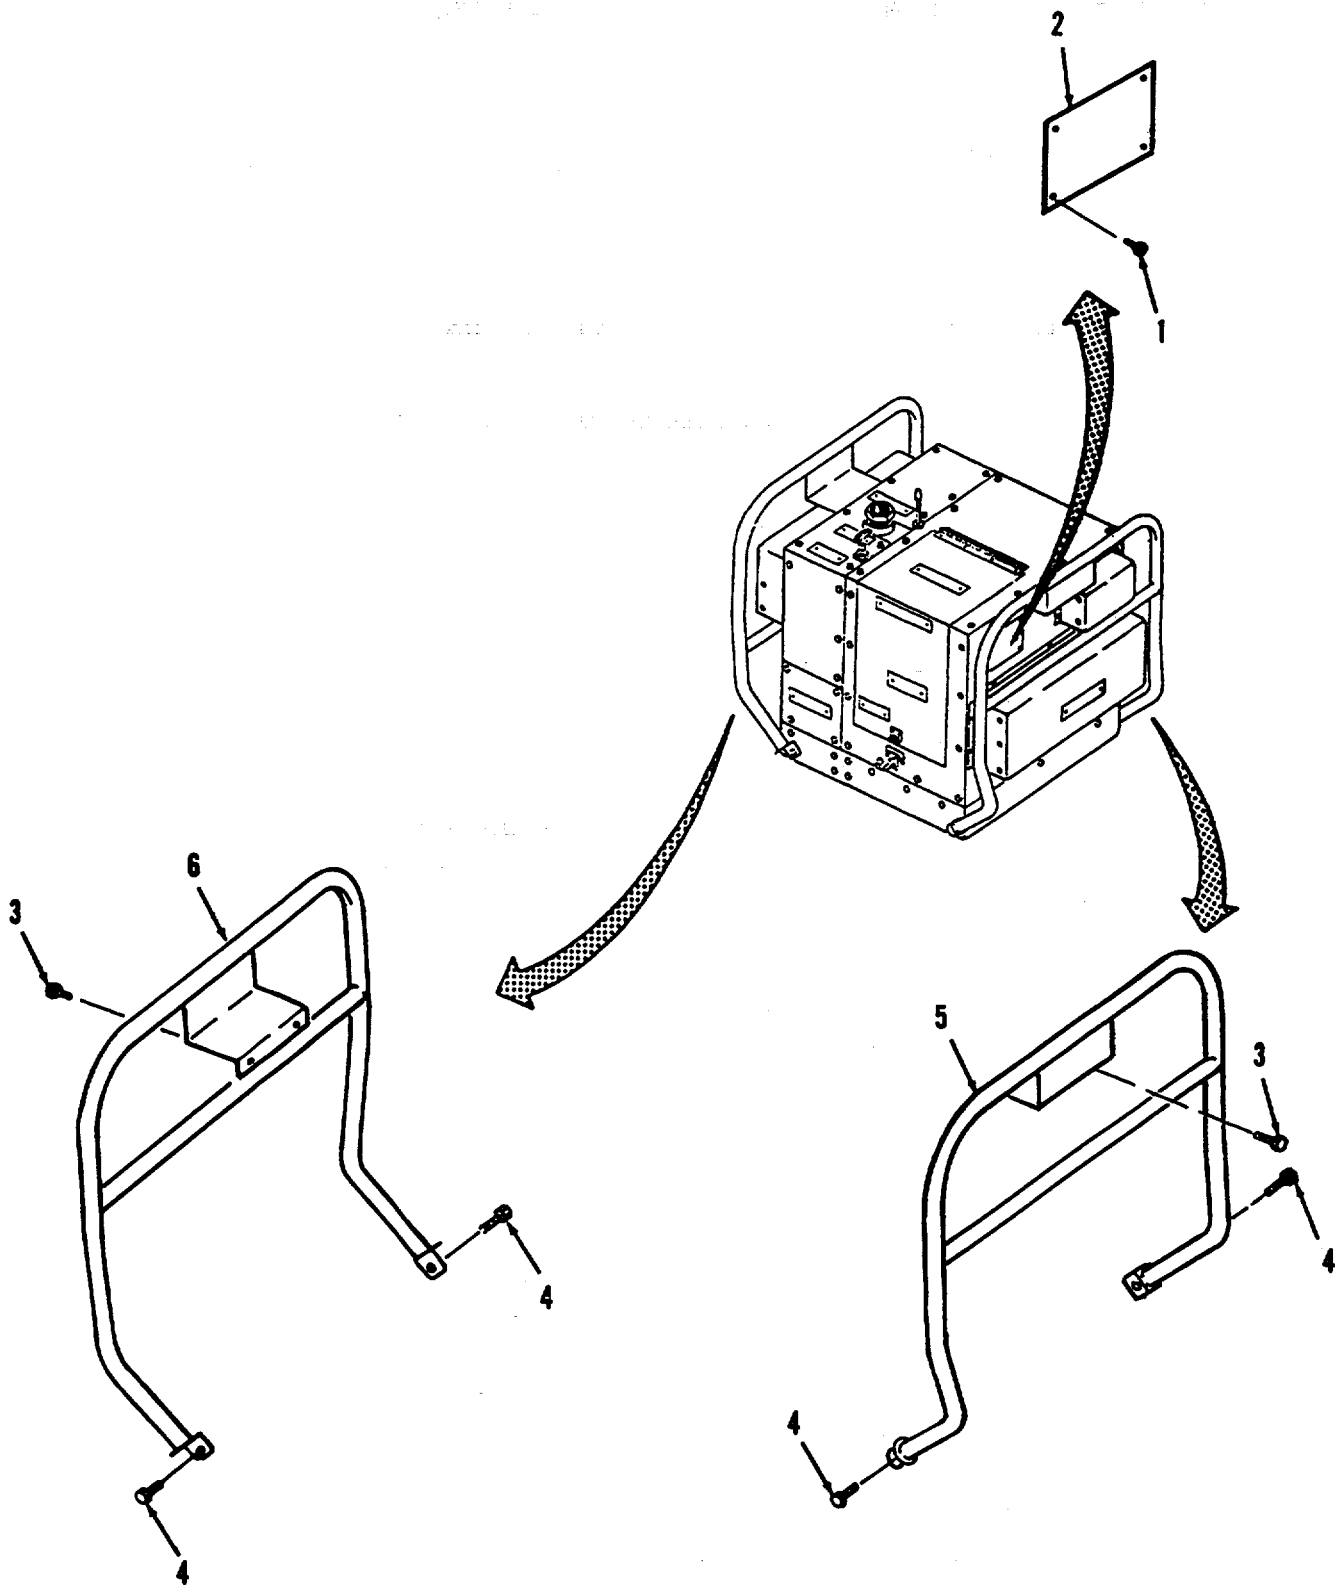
Enclosure Assembly (Sheet 1 of 4)
